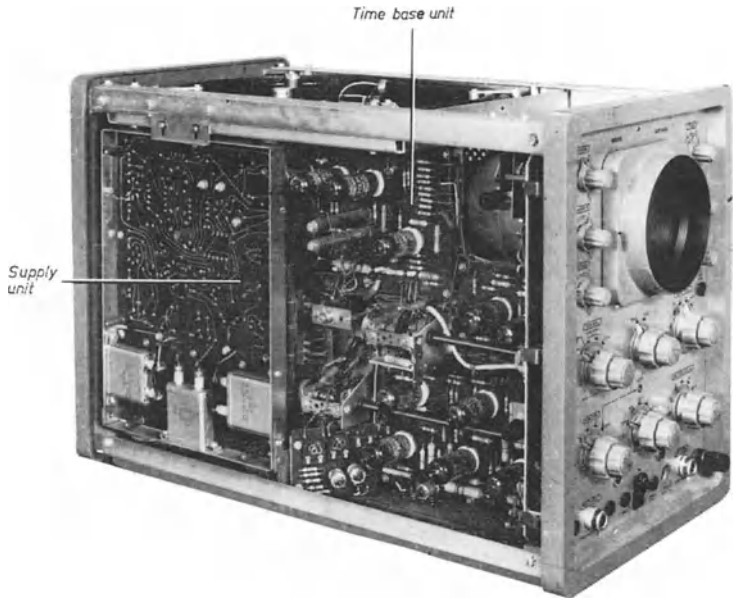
Philips "GM 5602" oscilloscope. Showing latest form of frame construction and printed circuit
